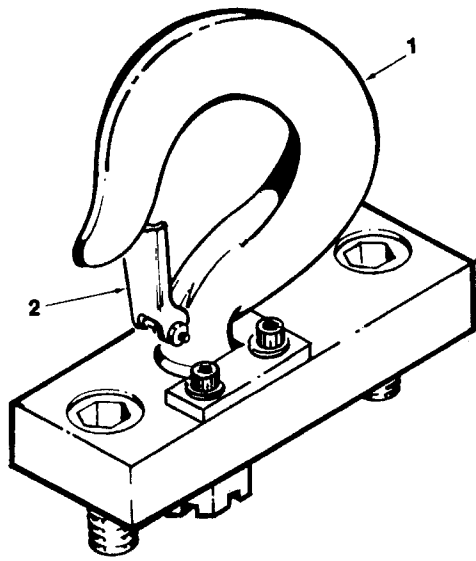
SUSPENSION ASSEMBLY KITS
